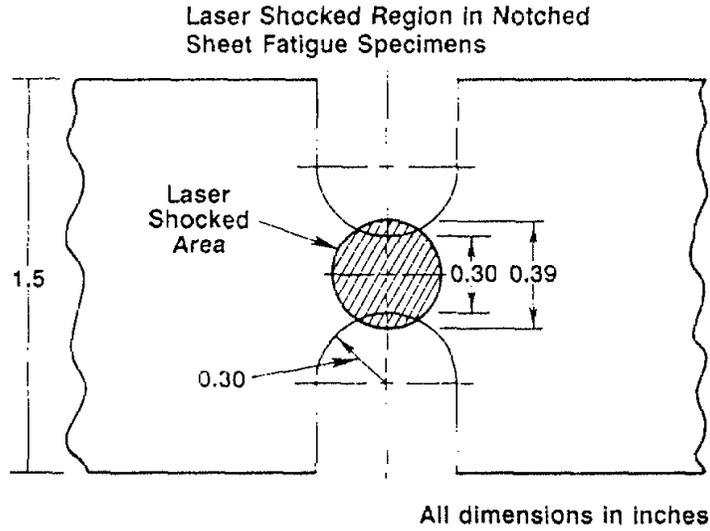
Specimen and Laser Shocking Configuration for the Thin, AISI 4340 Steel Sheet. The Dimensions are in Inches
